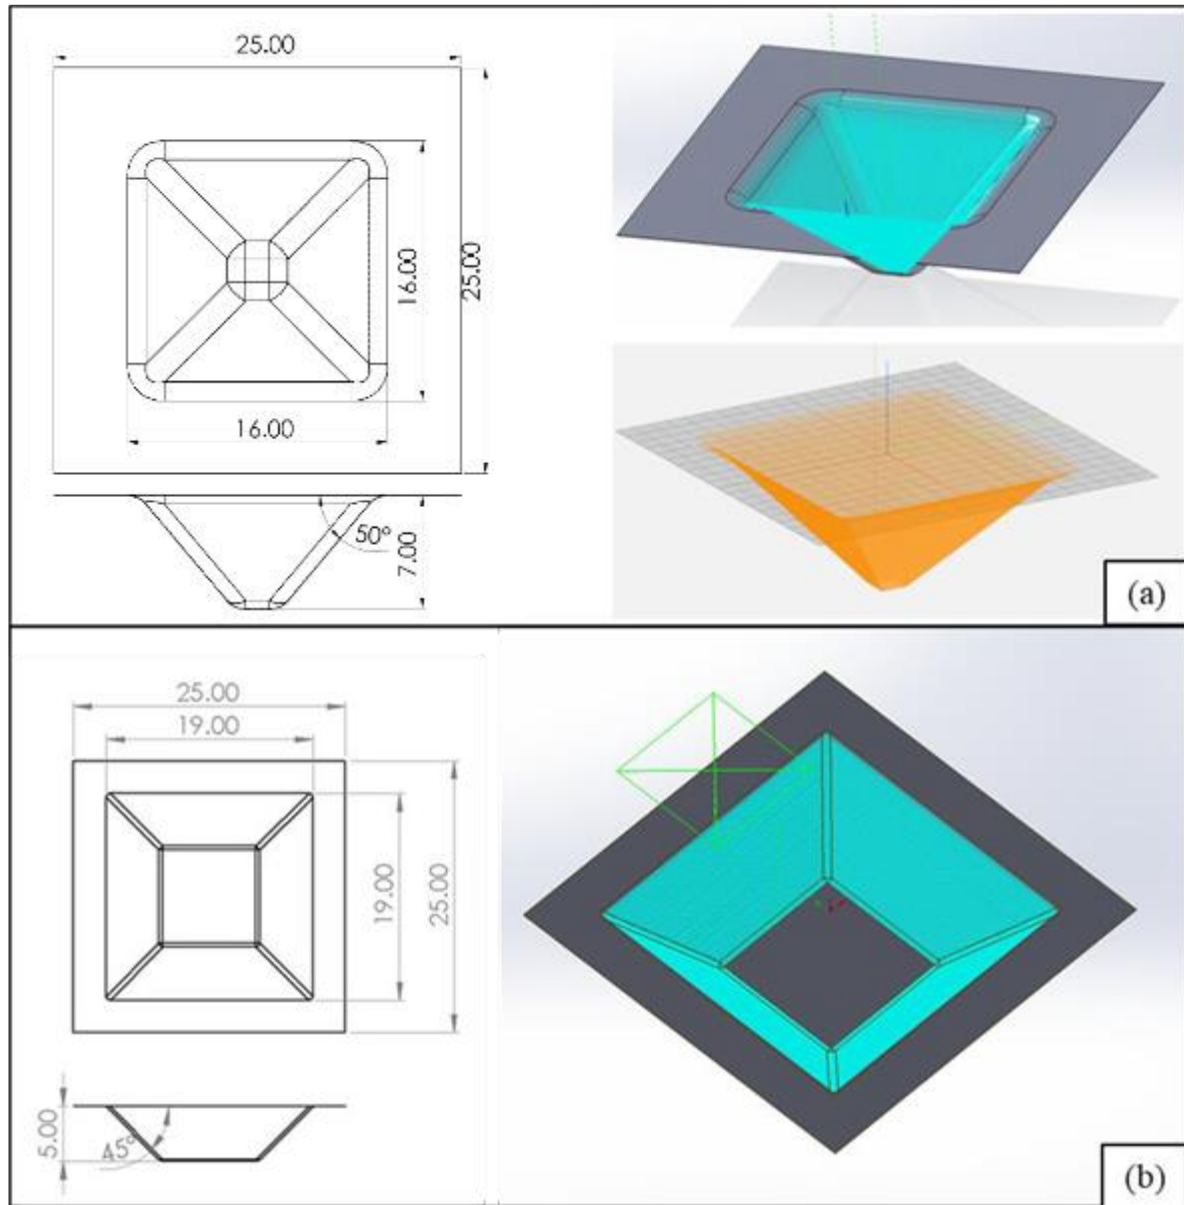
CAD Drawing and the plotted toolpath for (a) 7mm depth with 1.5mm fillet radius and (b) 5mm depth with 0.5mm fillet radius
